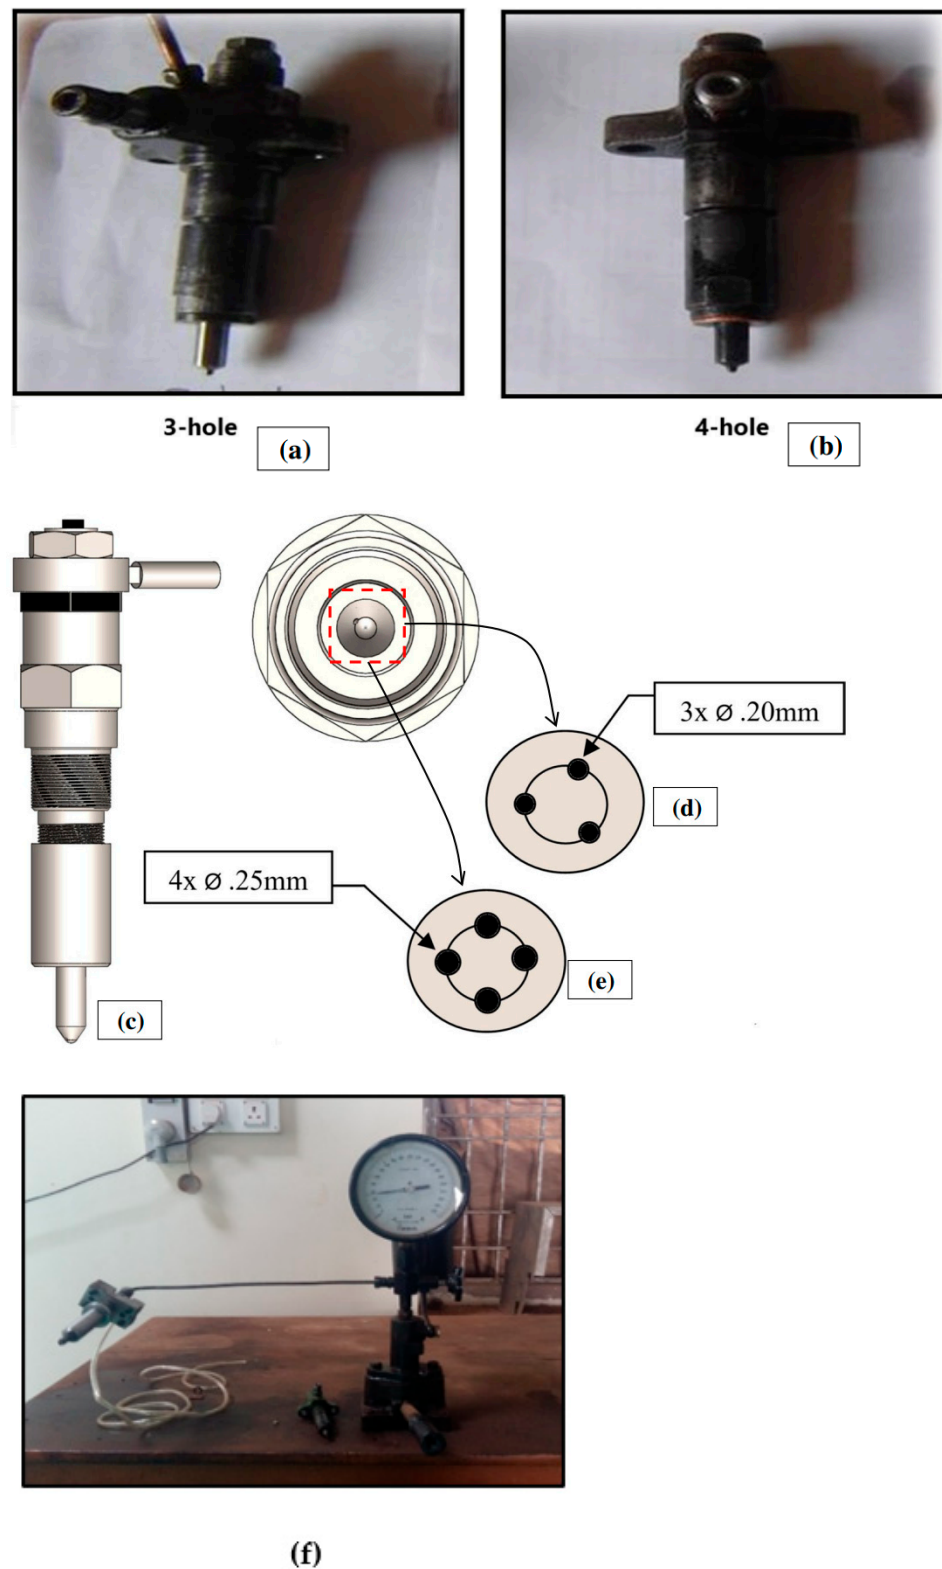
(a–e) The 3- and 4-nozzle hole fuel injectors [36]; (f) injector pressure tester.
